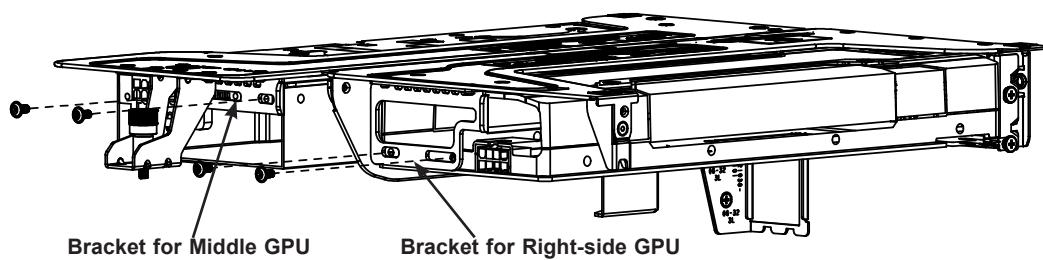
Attaching the Front Bracket for Middle and Right-side GPUs
